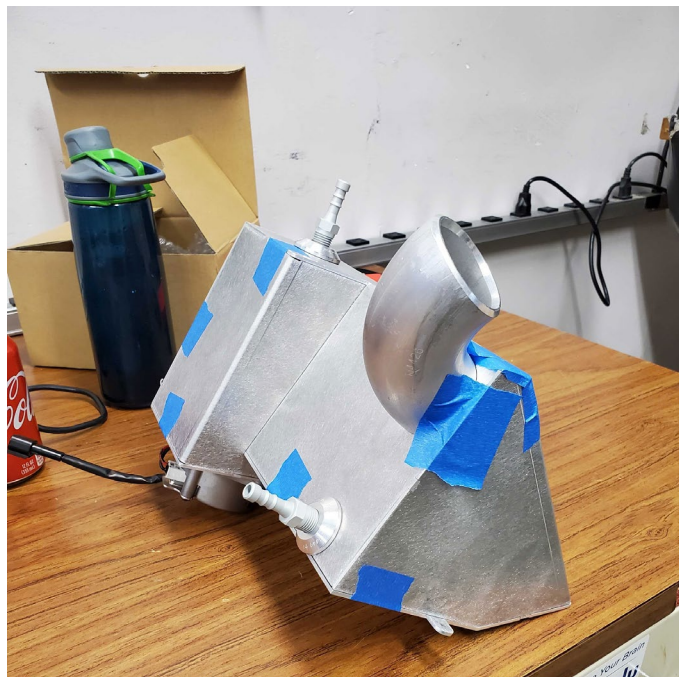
Fuel Tank Manufactured and Mocked Up Prior to Welding
